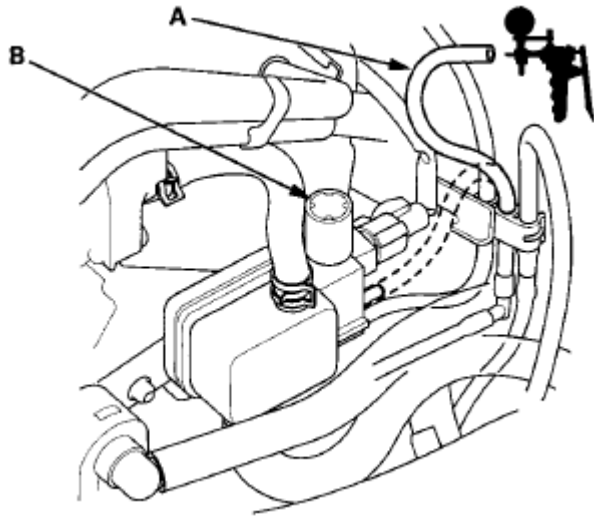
Identifying Vacuum Hose And Engine Mount Control Solenoid Valve
